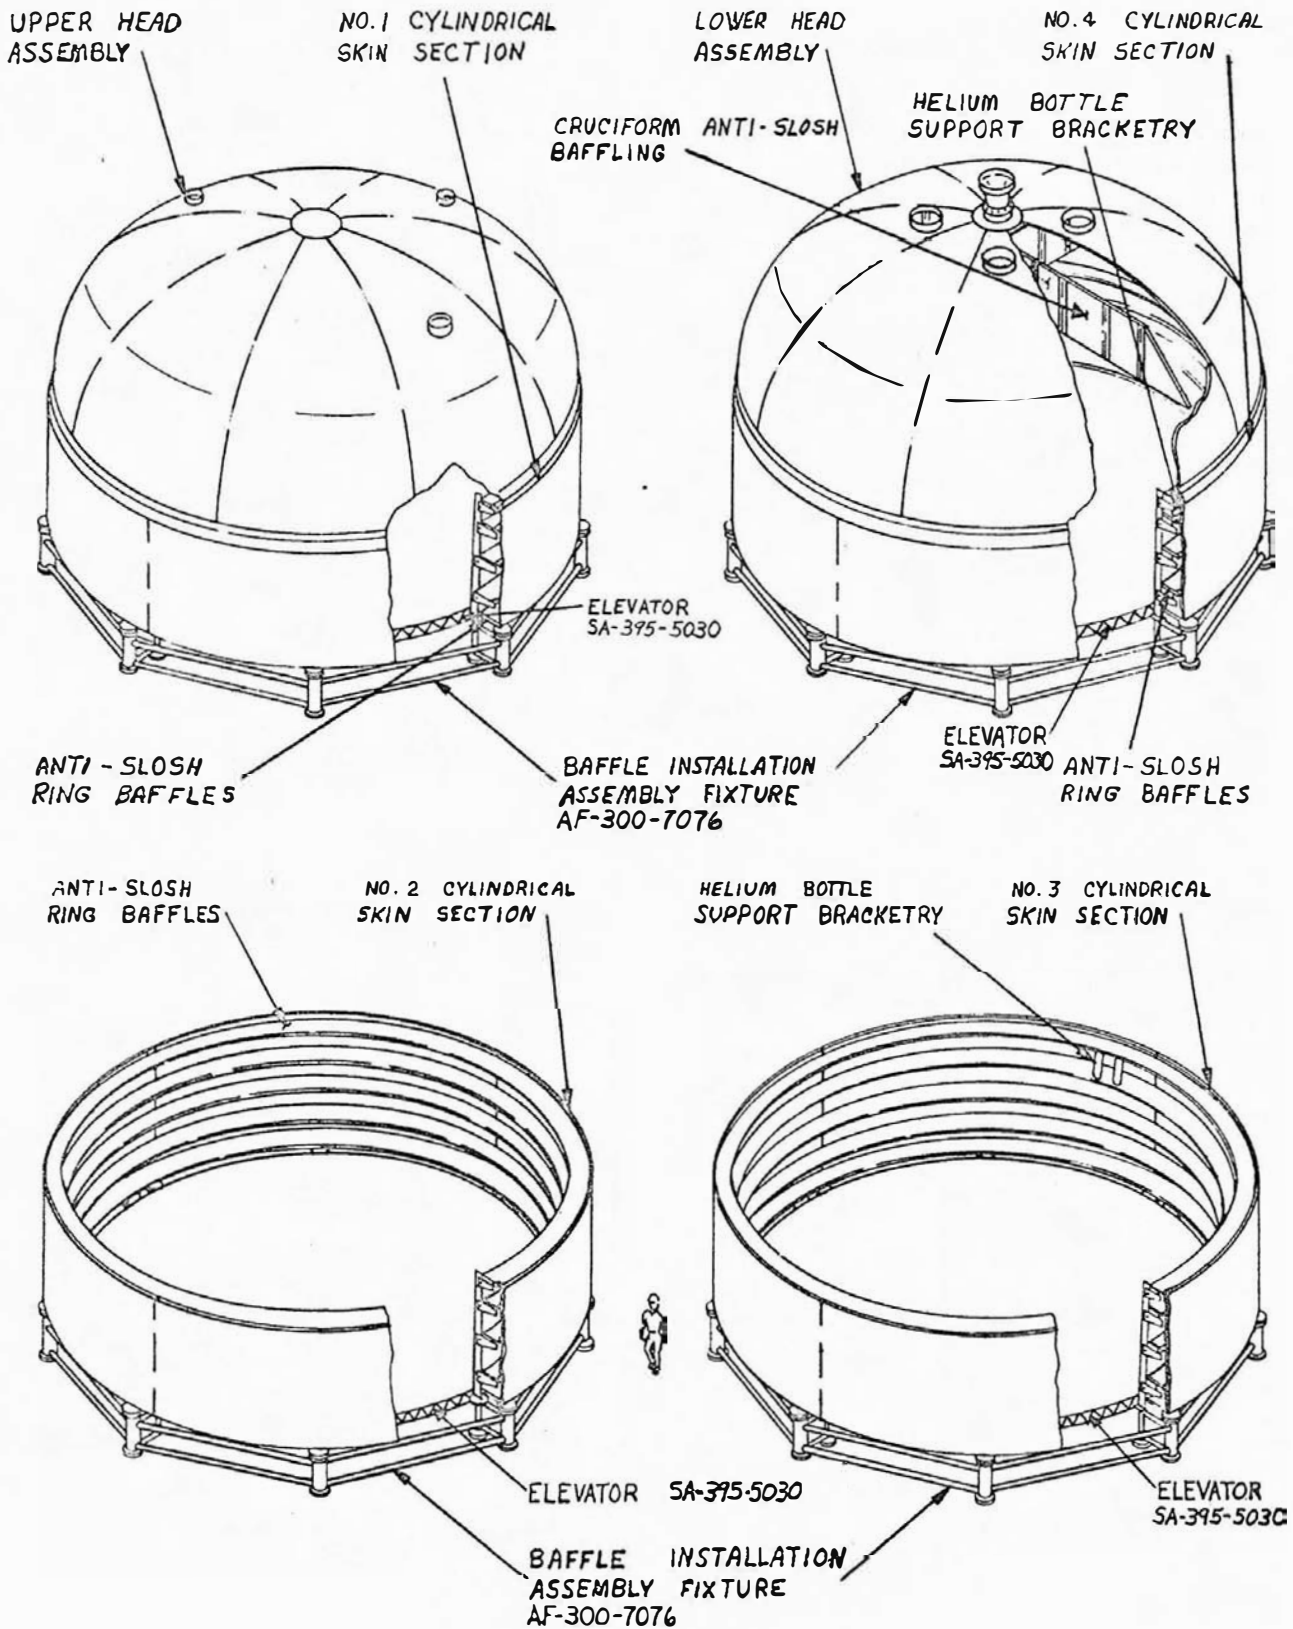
Baffle Installation (Oxidizer Tank Assembly)
